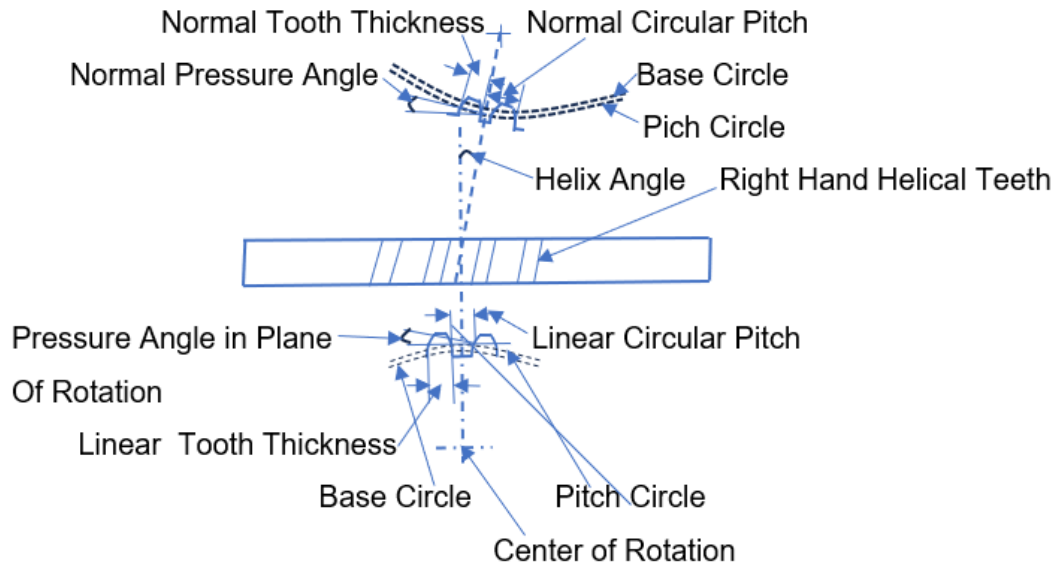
Helical Gearing Nomenclatures (Source: Philadelphia Gear Corporation Handbook)
